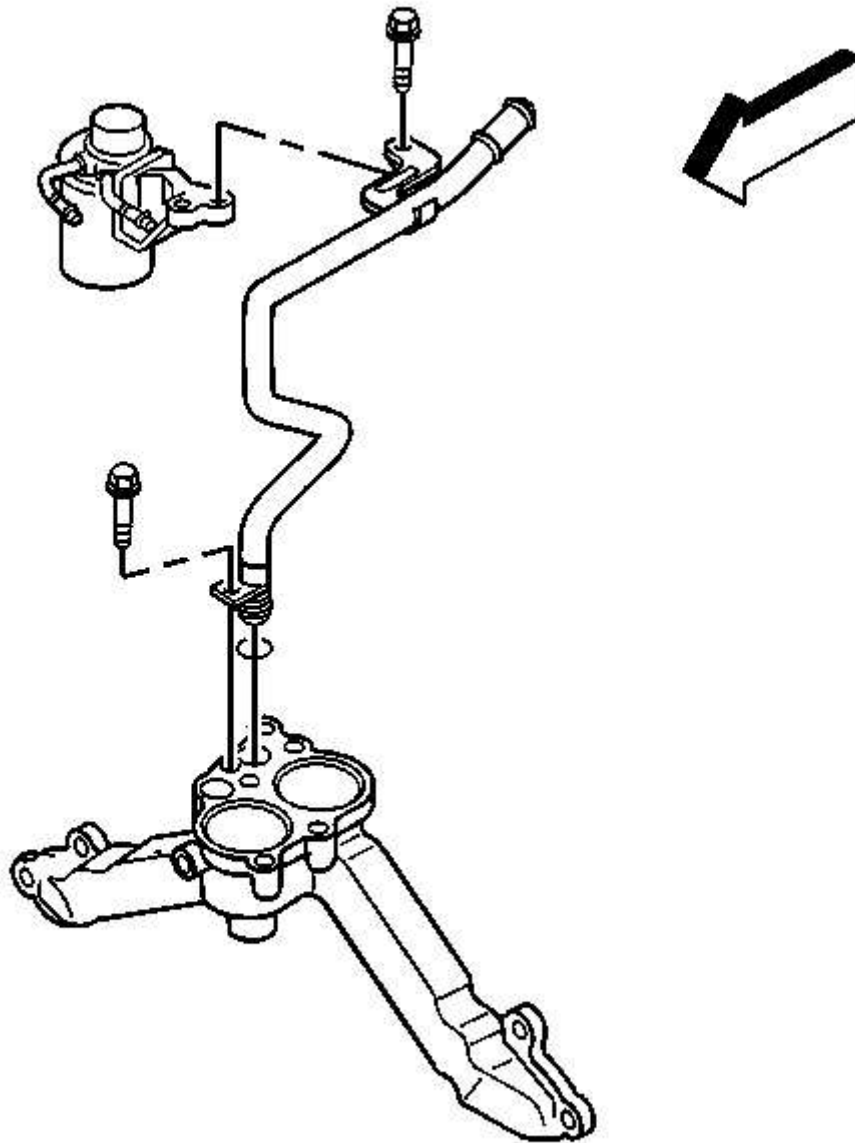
View Of PCV Oil Separator & Bracket
